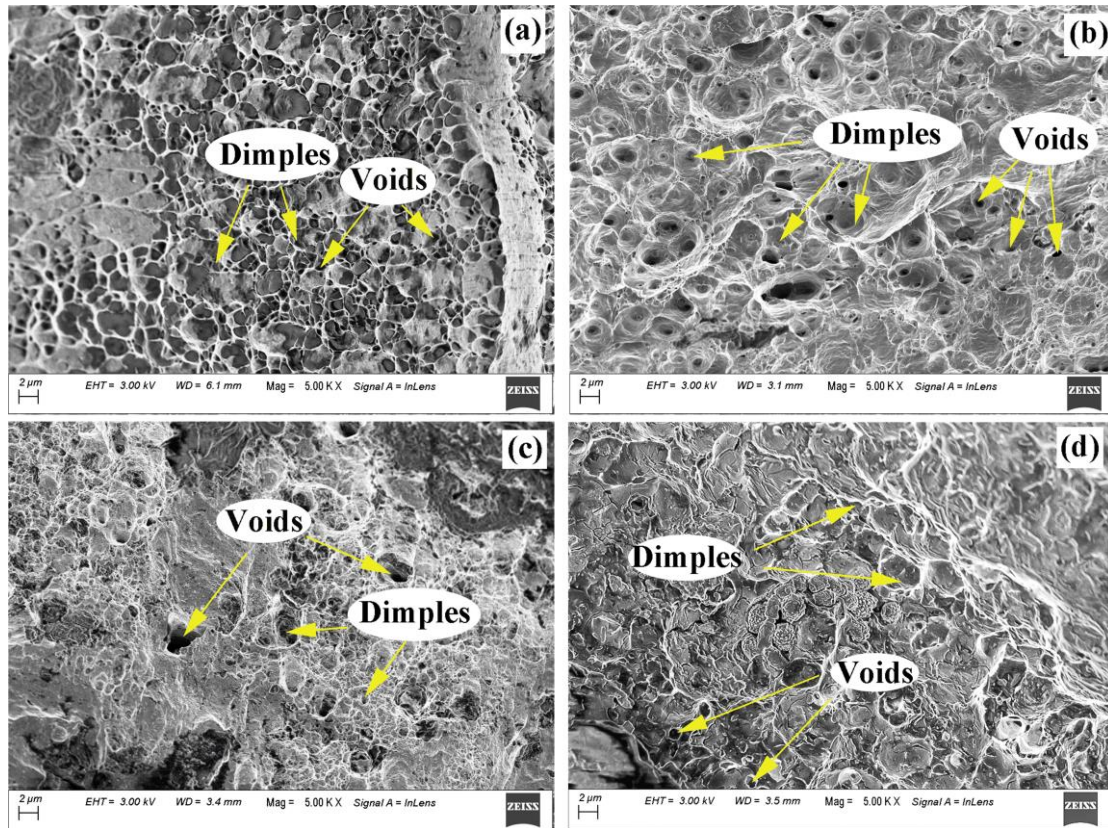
SEM images of the fracture surfaces of (a) base material, (b) T1, (c) T2, and (d) T3 specimens
